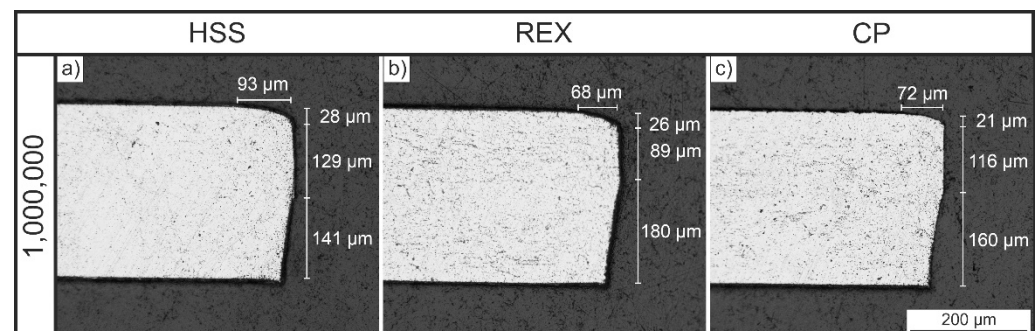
Optical images of cutting surfaces of parts blanked with different punch materials (HSS (a), REX (b) and CP (c)) after 1,000,000 strokes. HSS-parts feature highest burnish zone with 129 μm .
